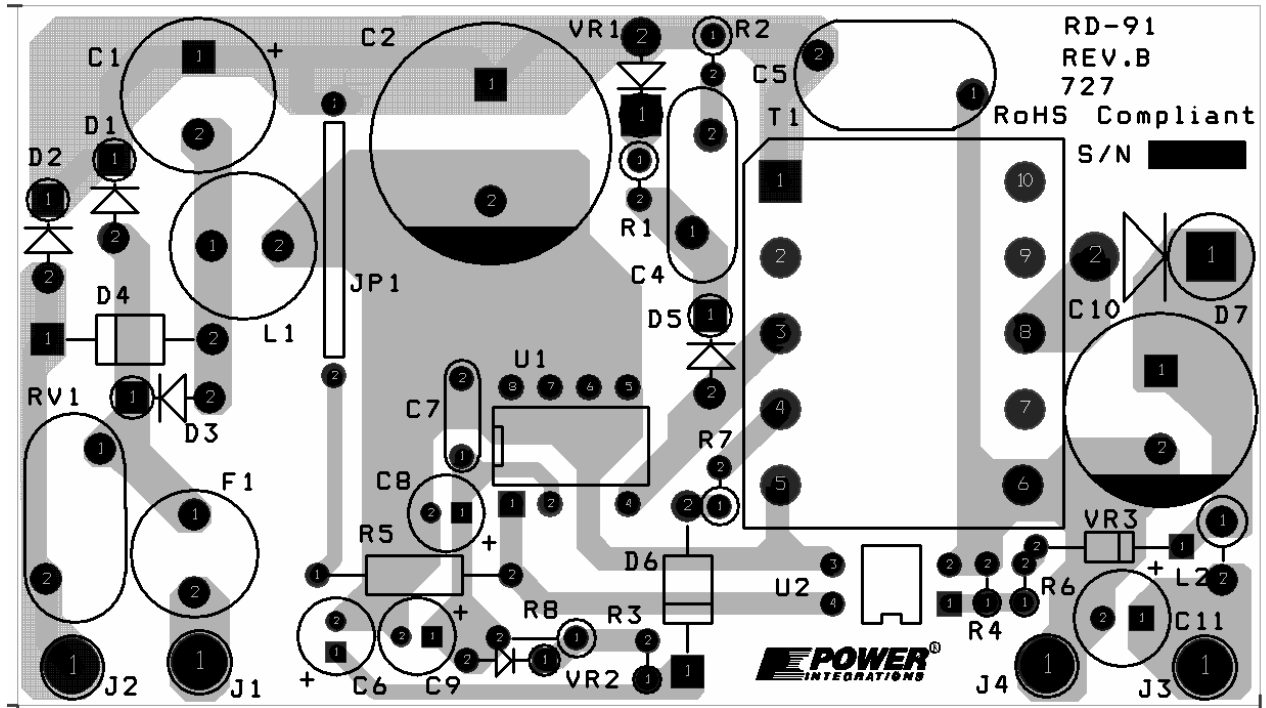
Printed Circuit Board Layout (3.2 × 1.8 inches).
